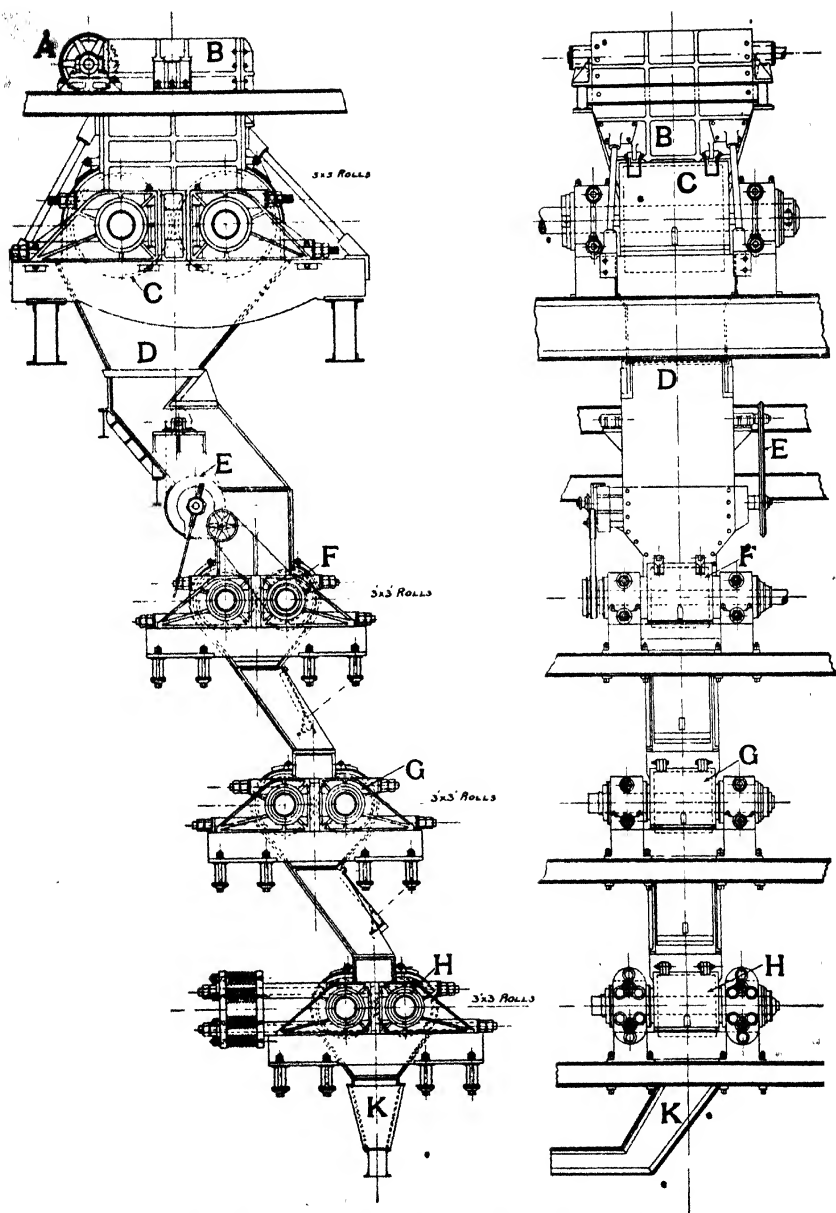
Arrangement of an Edison coarse-crushing plant.
